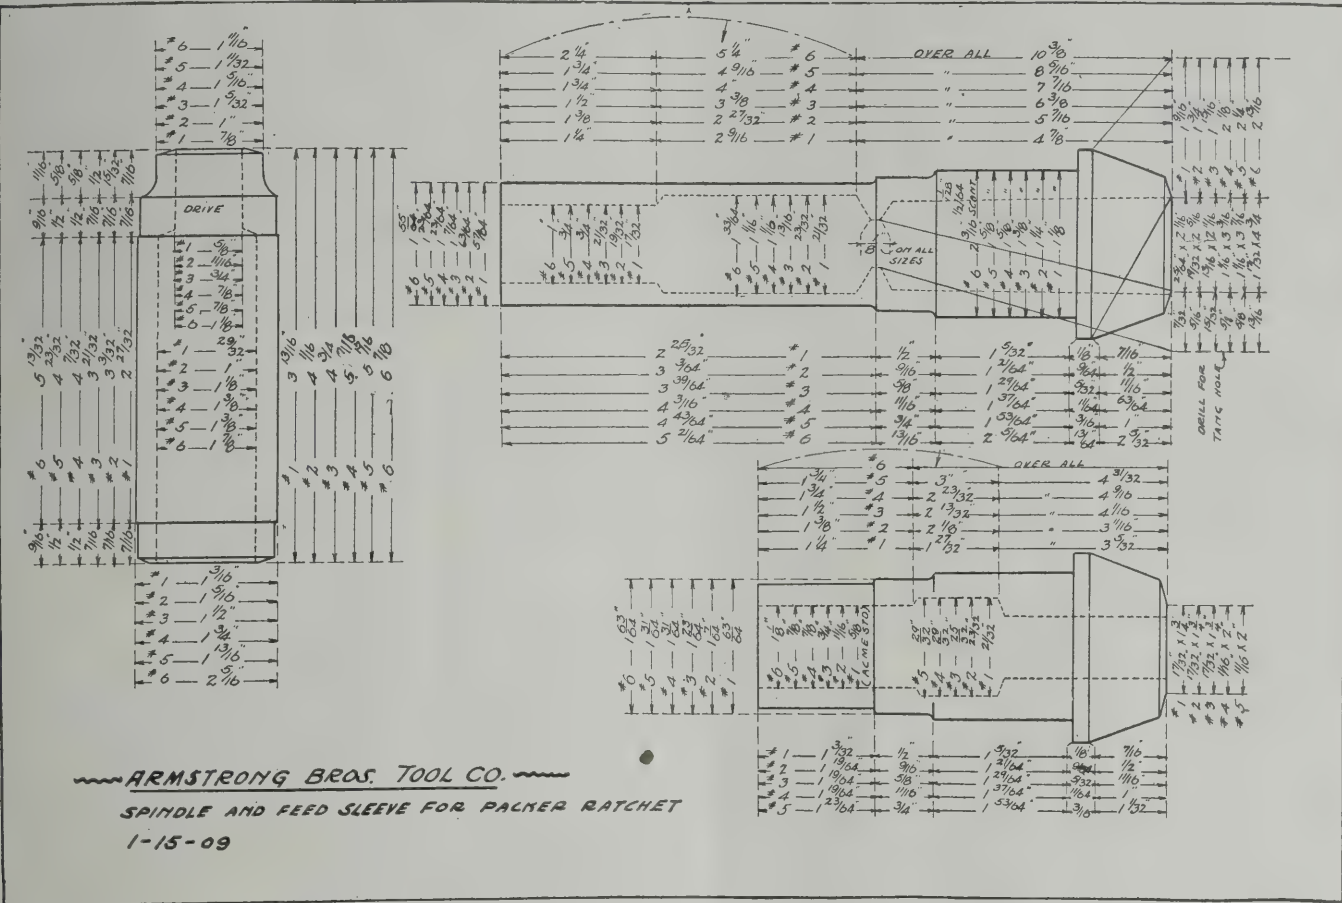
Drawing giving Dimensions of Six Different Sizes of Spindle and Feed Sleeves
